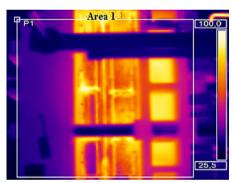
Temperature field of mold equipment in manufacturing machine No. 1 – view from mold parting side
